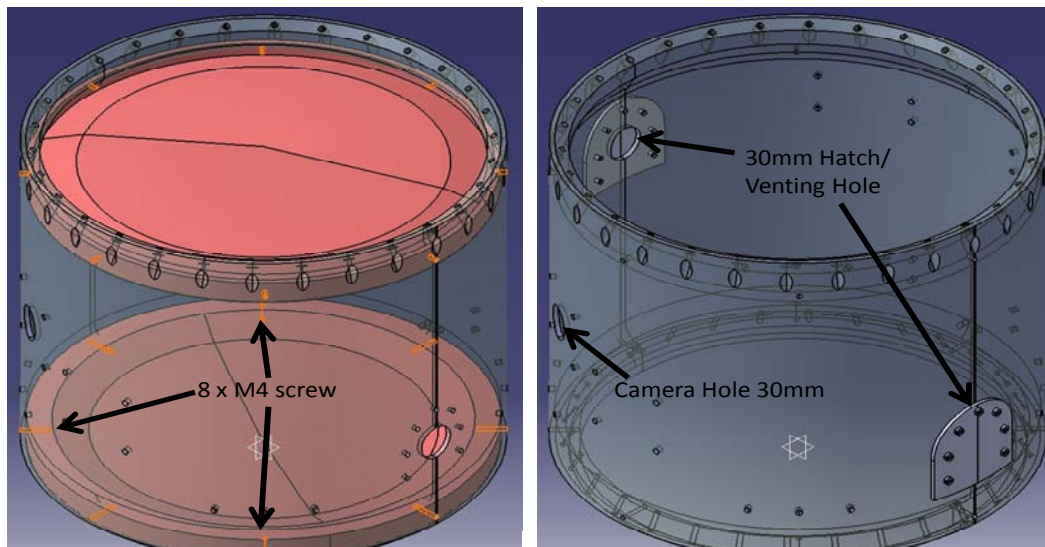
Fluid Collection Device Support & Hatch/Venting Hole.
